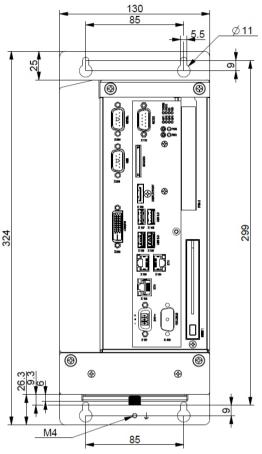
Dimensions: Front side with keyholes (KBox C-101-1 with fan tray option)
